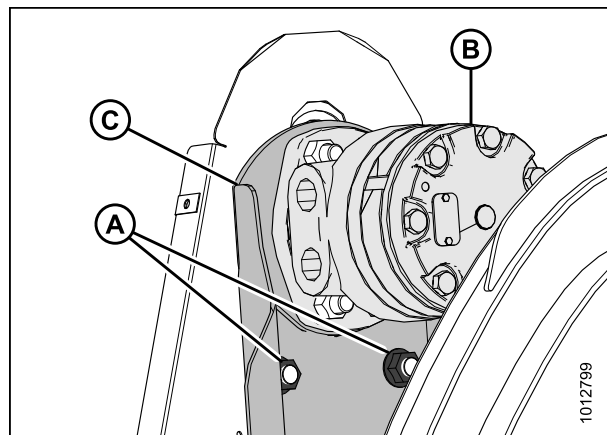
Single-Reel Drive Shown – Double-Reel Drive Similar
